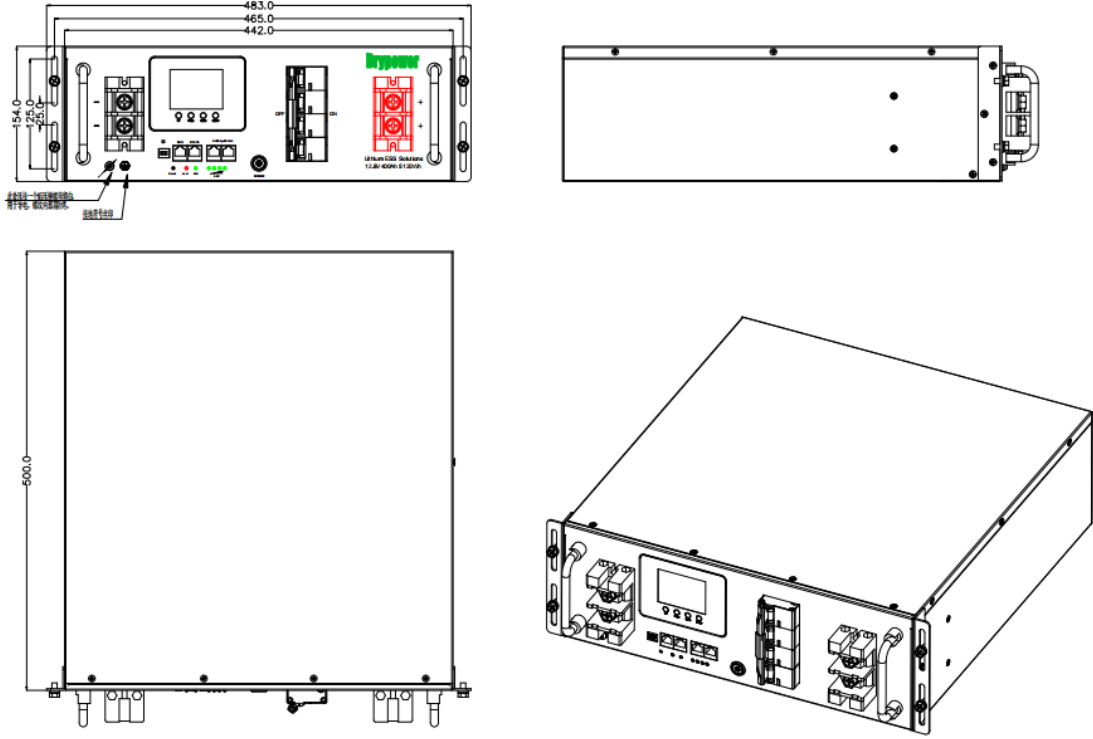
DP-12400-R Appearance & Dimension Drawing
